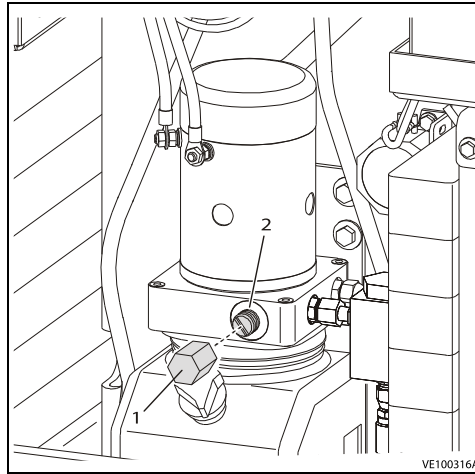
Hydraulic Pressure Adjustment Screw (Machine Rear Covers Removed)
